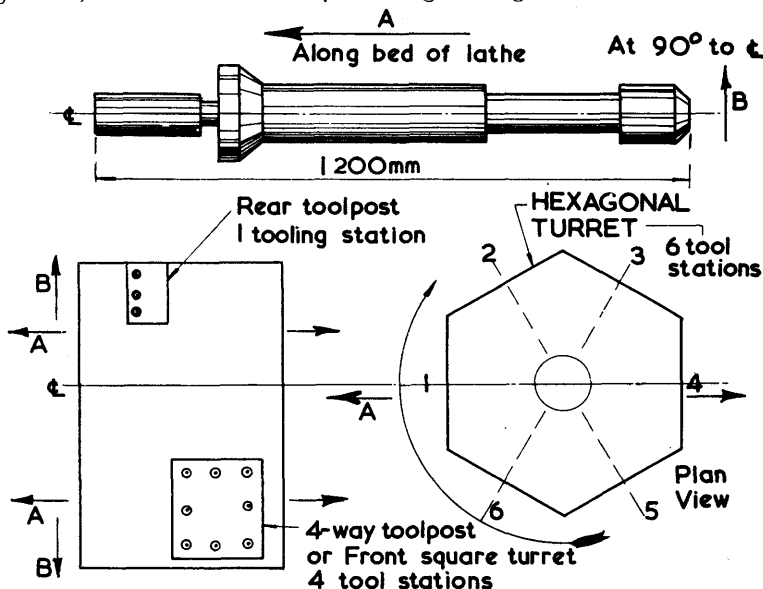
Tooling Stations on a Turret Lathe.
